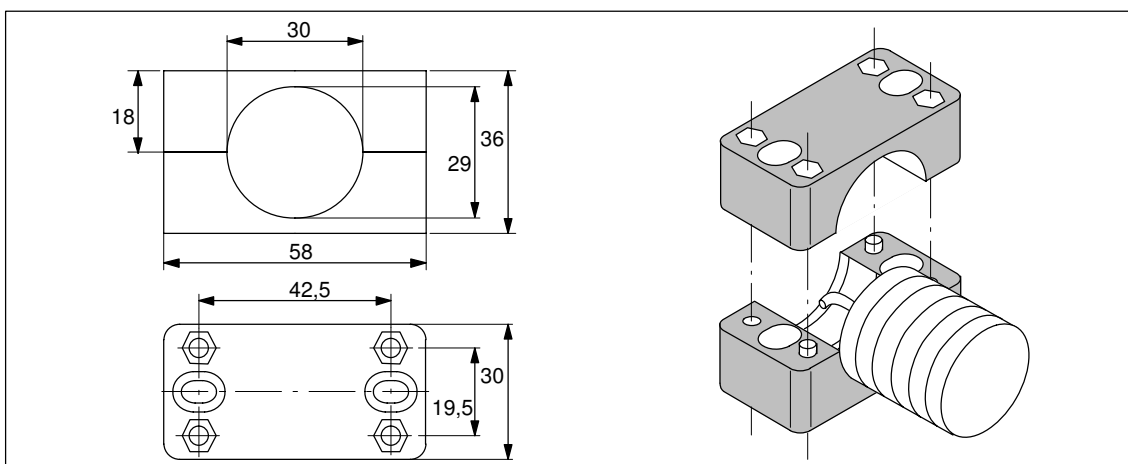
Mounting diagram and dimensions of SLG 40 with mounting clamp
